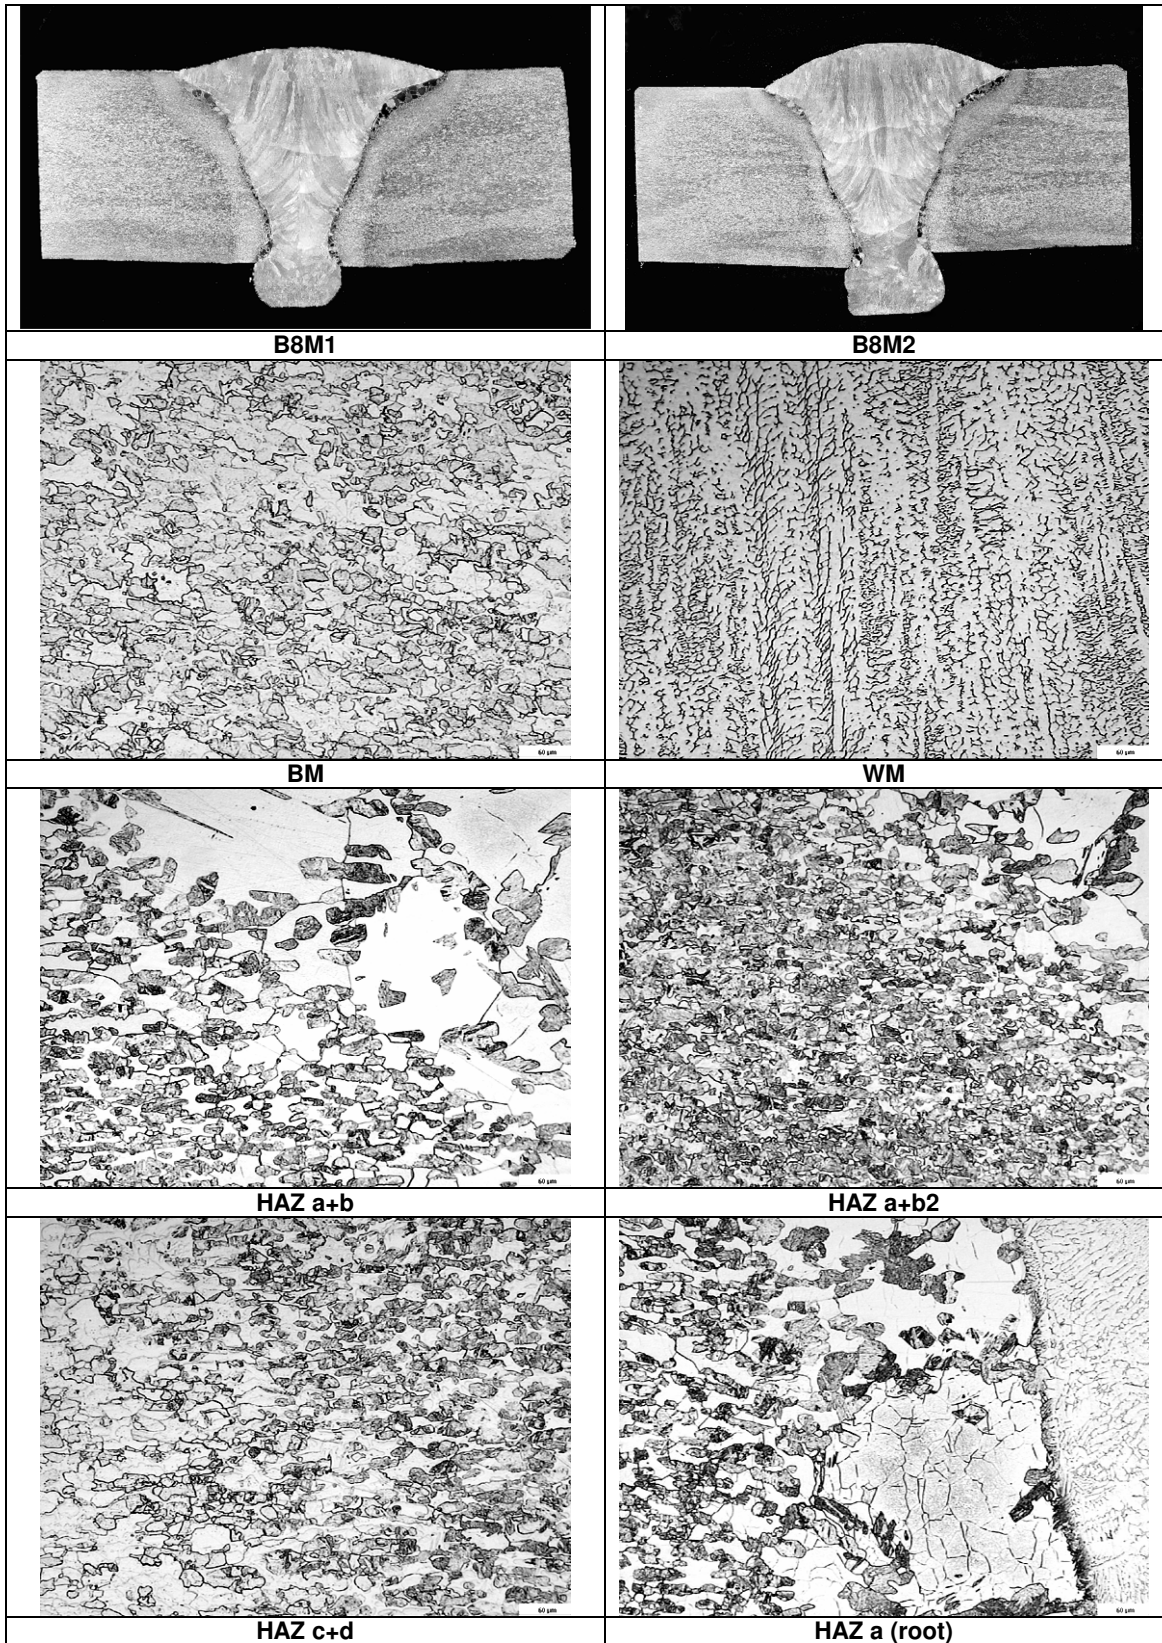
Macro and micrographs of 12 mm thick GMAW weld with 308 filler (B8).
